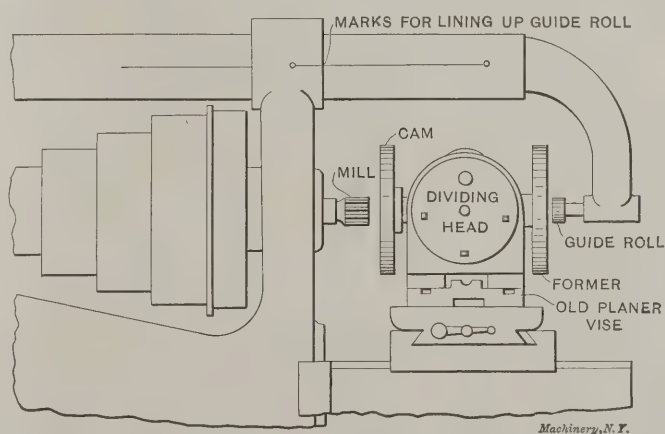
Inexpensive Fixture for Milling Plate Cams to Match a Former.
